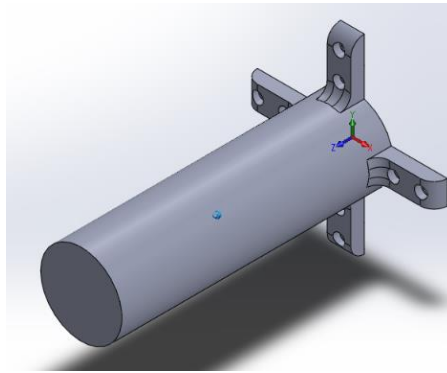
SolidWorks drawing of unused asset – roller alignment post.
